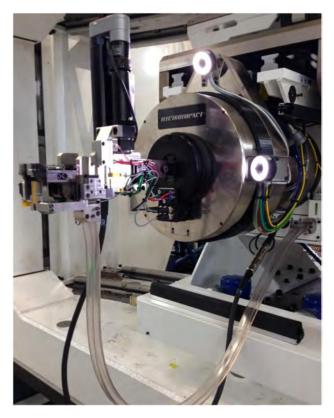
Nut runner anvil installed on PAL machine at Electroimpact
